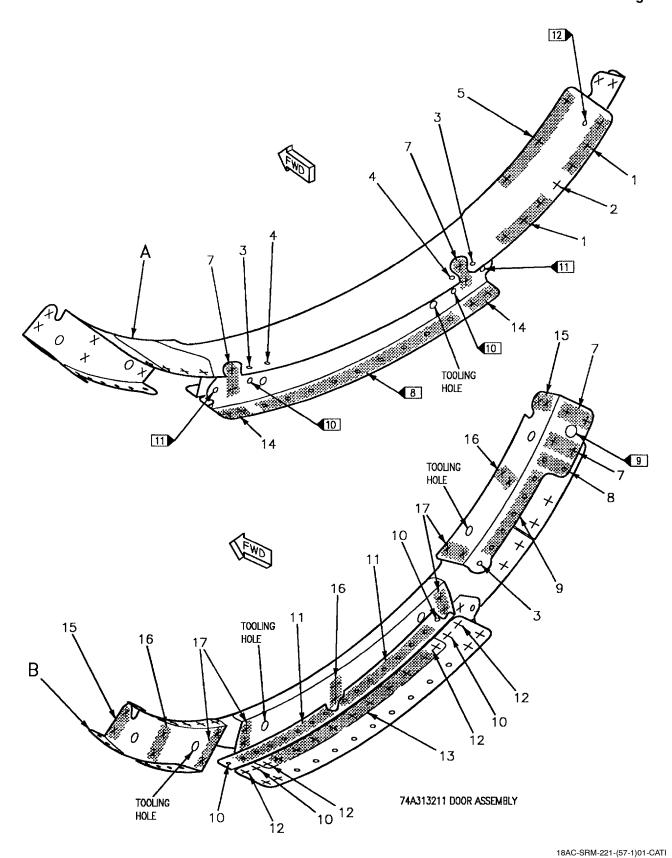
Former, 74A313188, Fastener Index (Sheet 1)
